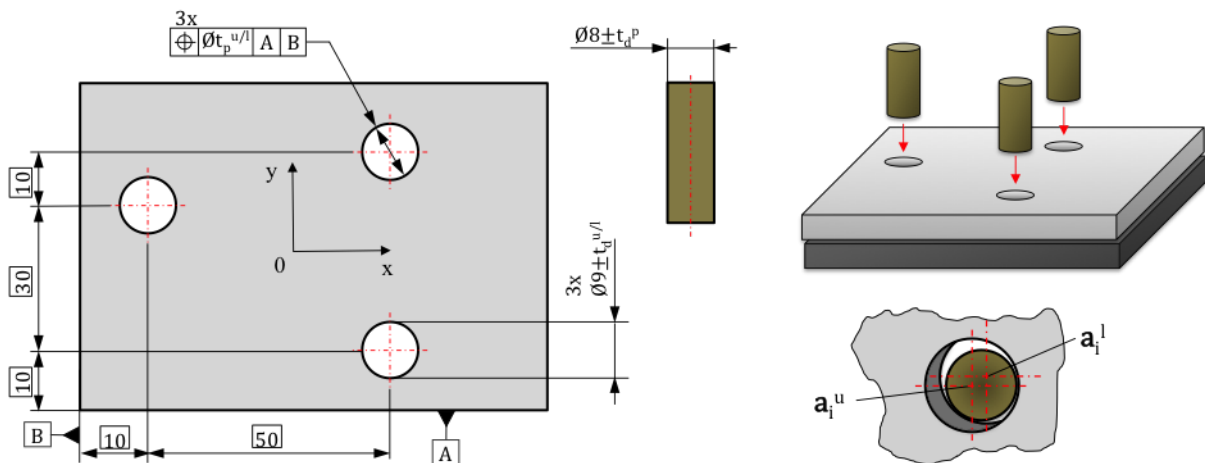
Considered tolerances of plates and pins (left), assembly (upper right) and geometrical context of constraint (6) (lower right)
